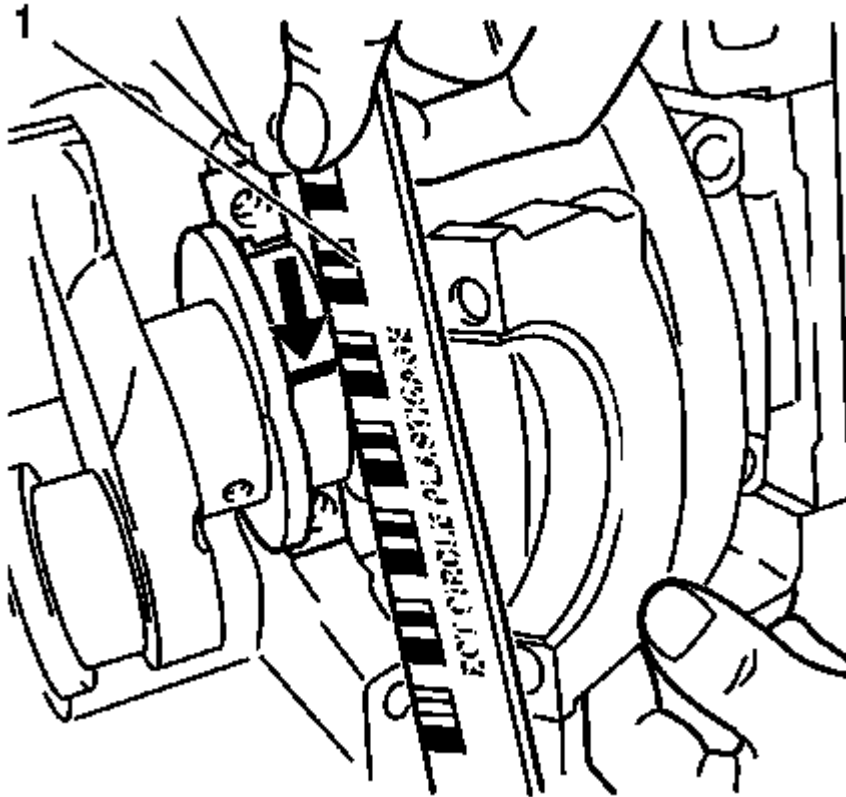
Measuring Crankshaft Bearing Play Using Measuring Scale
